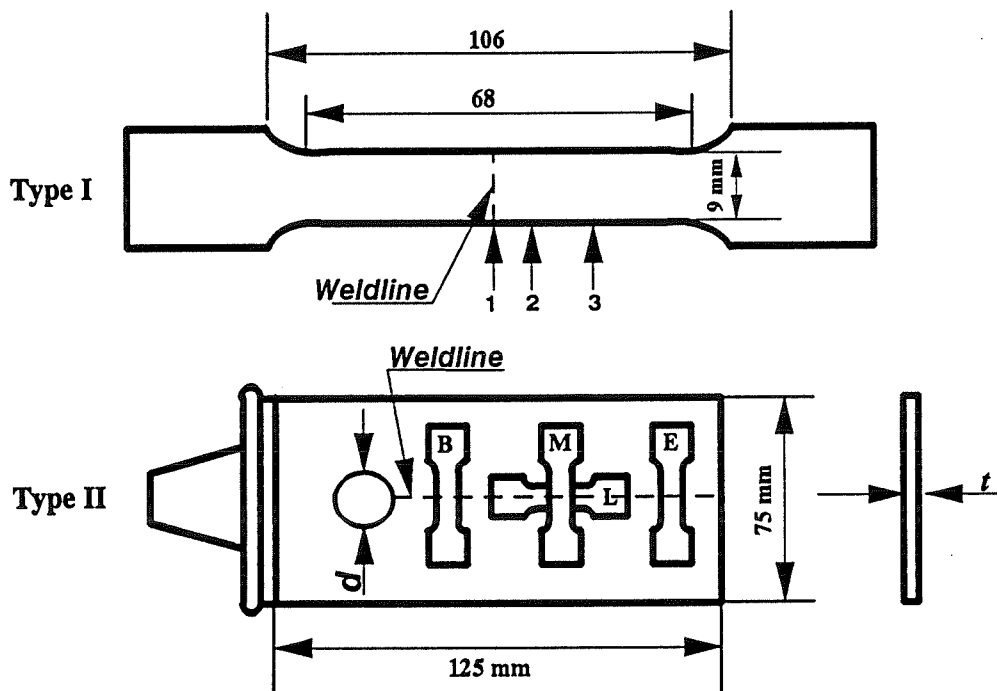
Mold cavities used in this work. Type I - directly molded tensile specimens. Type II - rectangular plaque with locations at which samples were machined. Plaques thickness: (t): 2, 4 and 6 mm, insert diameter (d): 6, 12 and 18 mm
